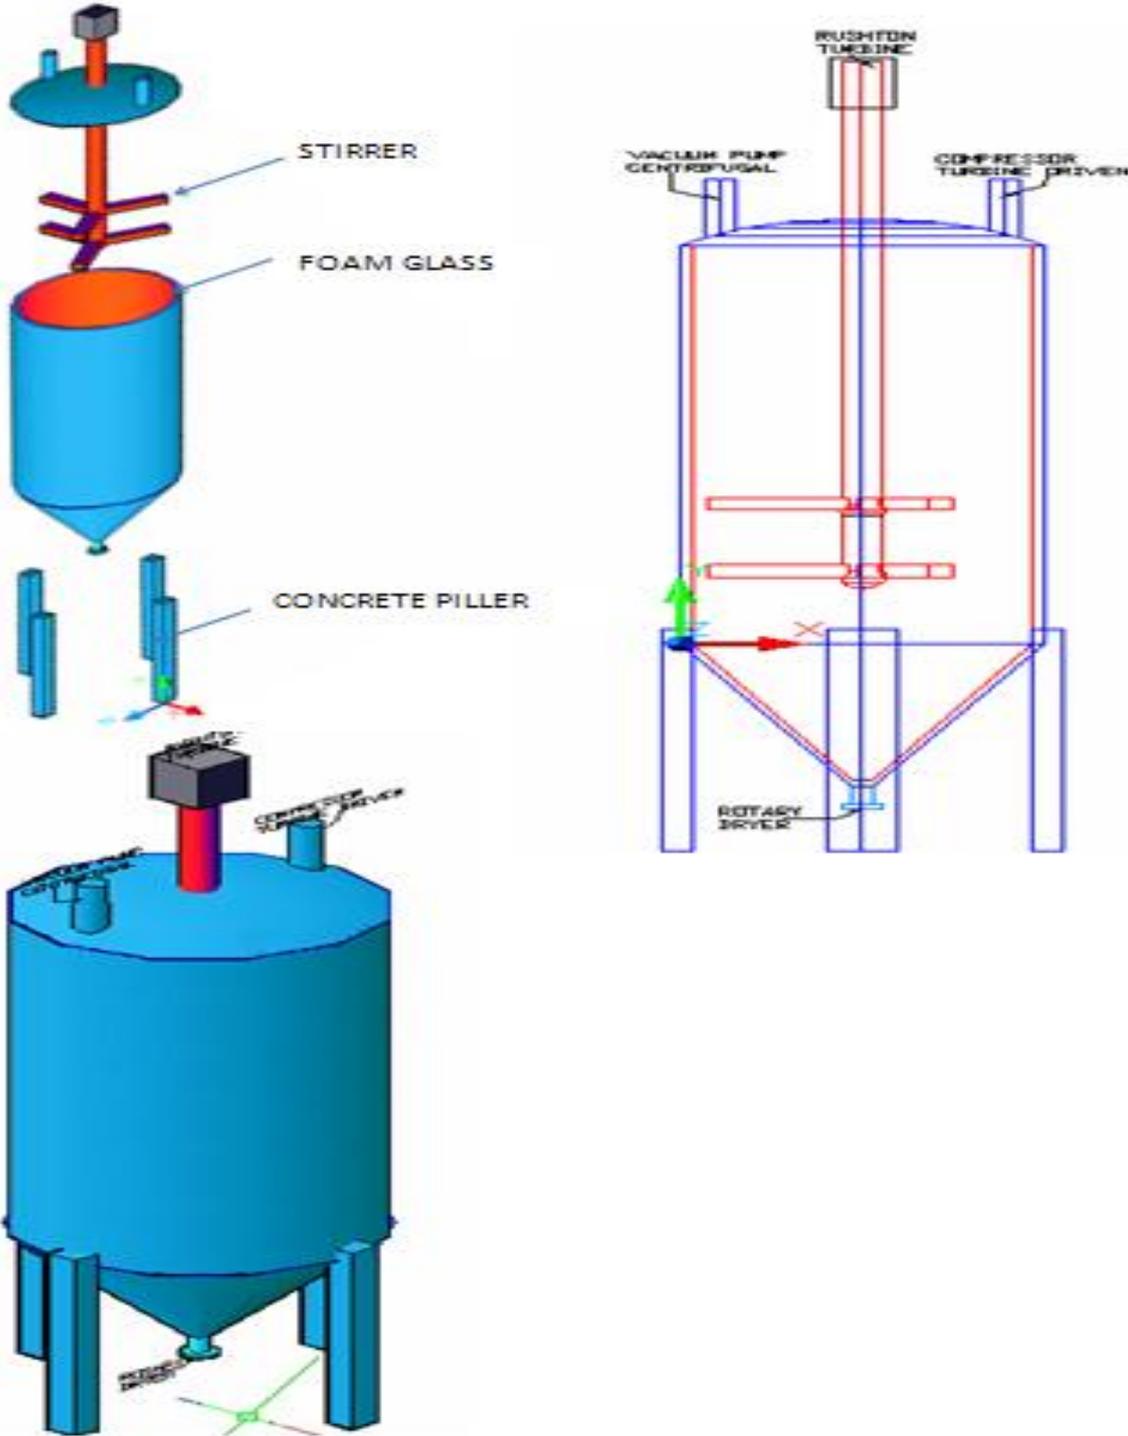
Exploded views and 3-Dimensional view of the Bioreactor
